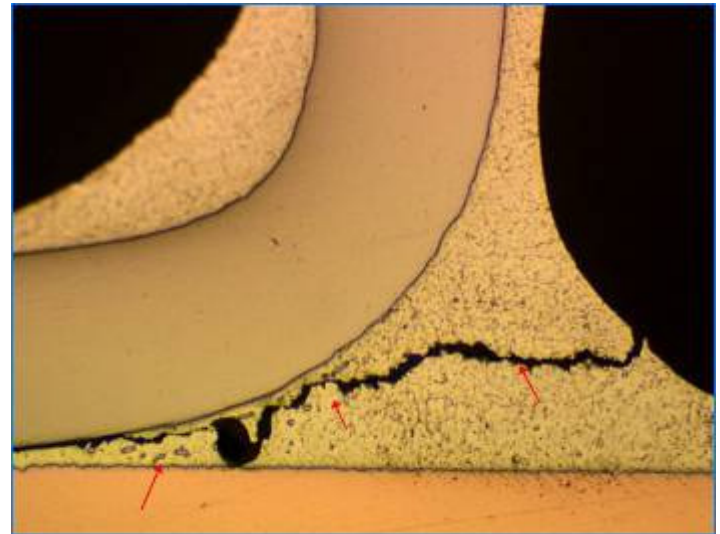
cross section, SN67, U61, left lead solder crack, 200xb
